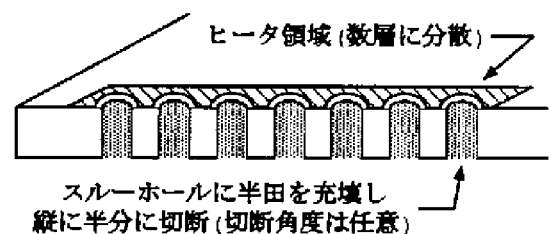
Structure of the soldering area at the edge of multi-layer printed wiring board.
